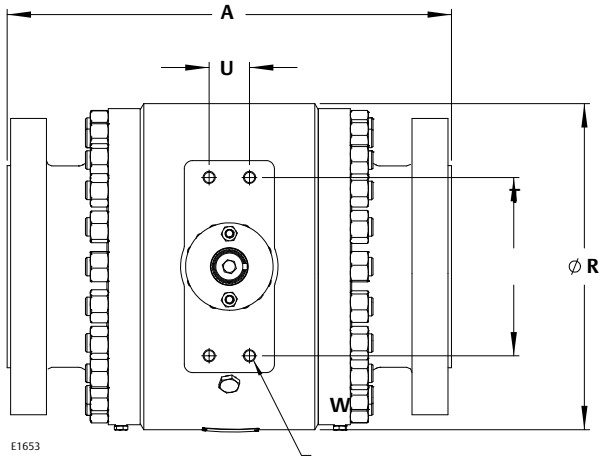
NPS 24 CL600 Packing Box Housing Mounting Pad Dimensions (see table 2)
